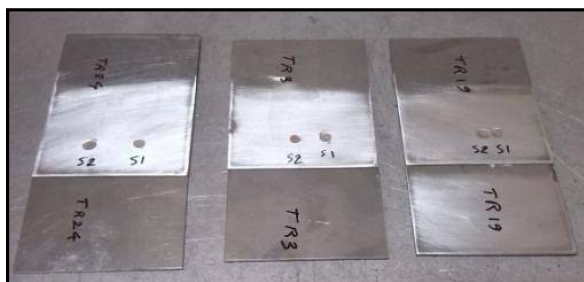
The samples with different welding intervals before cutting for tensile-shear test
